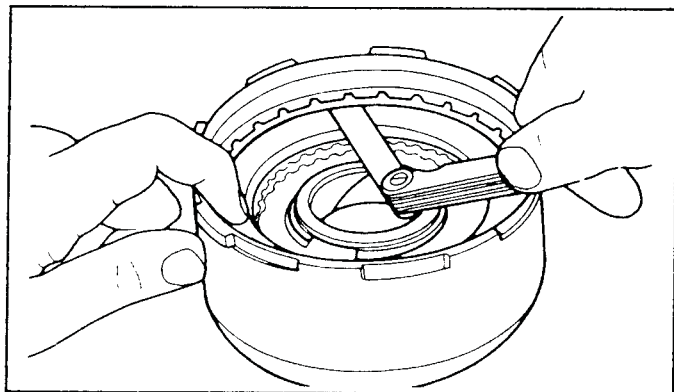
Checking Reverse-High Clutch Snap Ring Clearance
